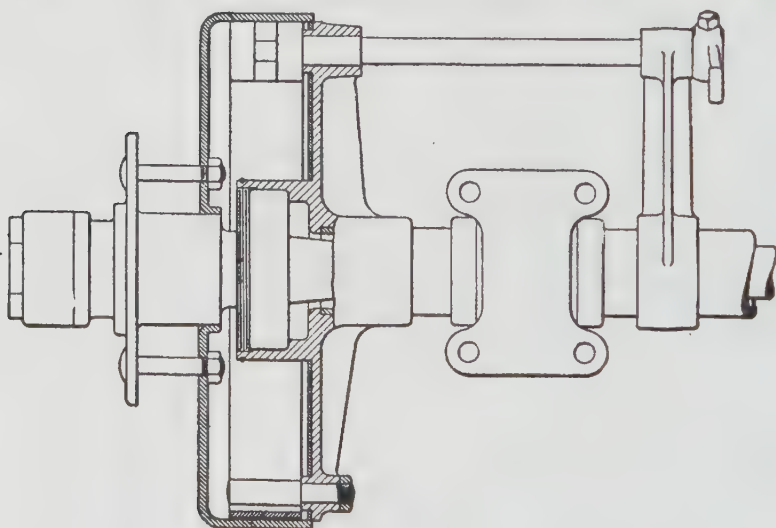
BRAKE SHAFTS CARRIED IN DOUBLE BEARINGS.
